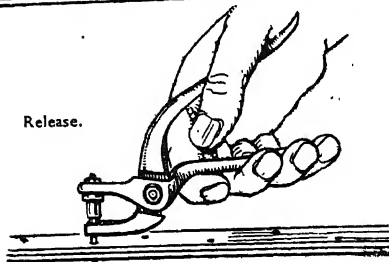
The Spencer riveting jig is fitted and removed with the aid of special pliers.
